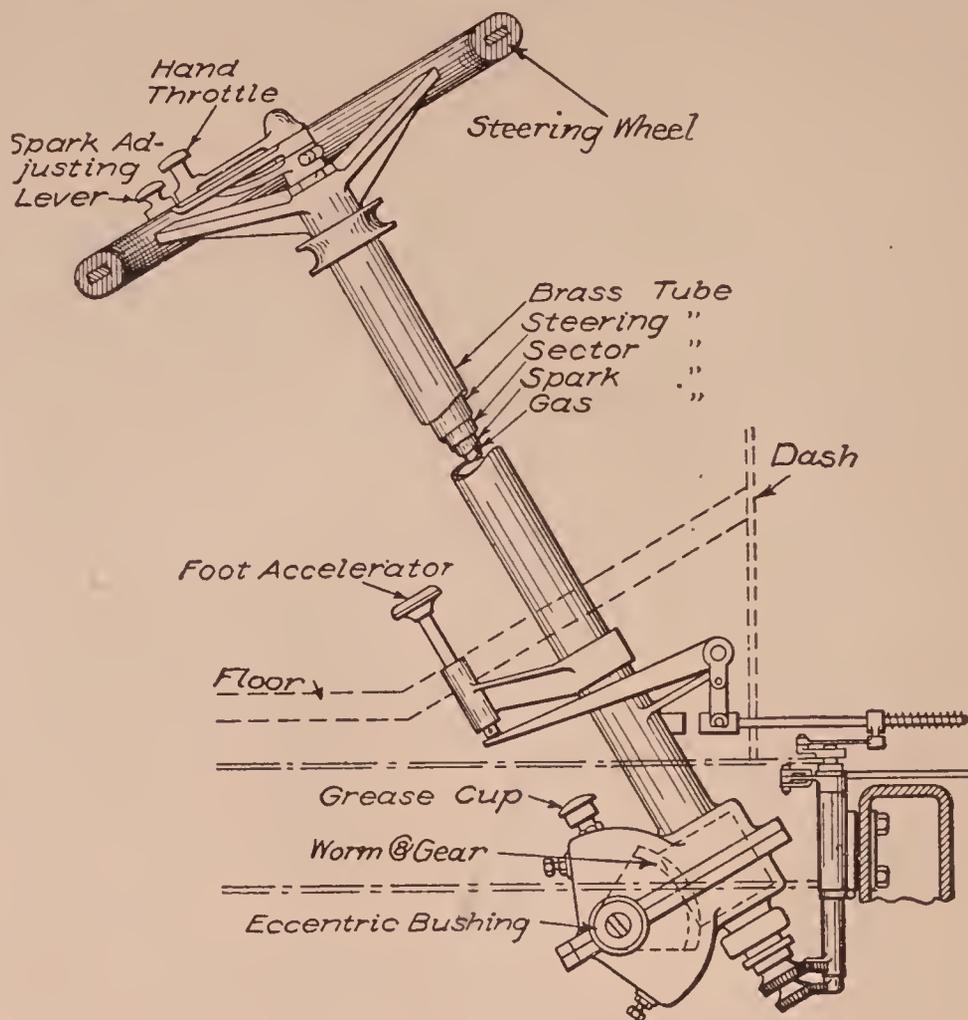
A steering gear partly sectioned to show how the various levers operate.
